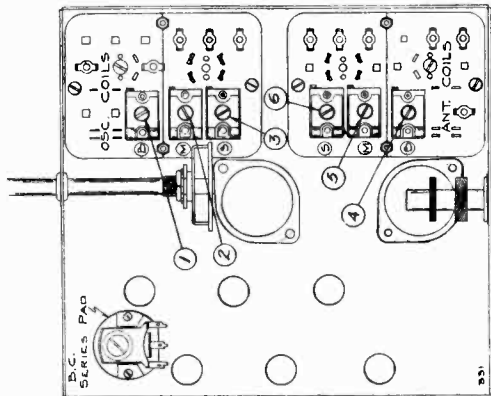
BOTTOM VIEW SHOWING TRIMMERS
